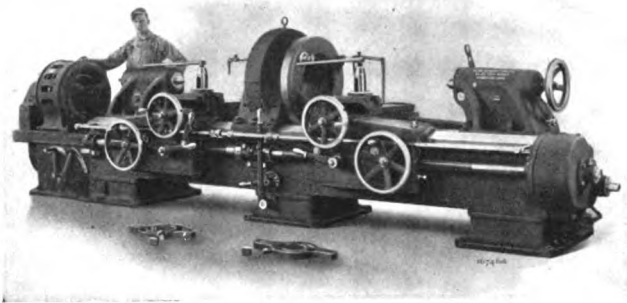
No. 3—Heavy Axle Lathe, Center Driving Type
